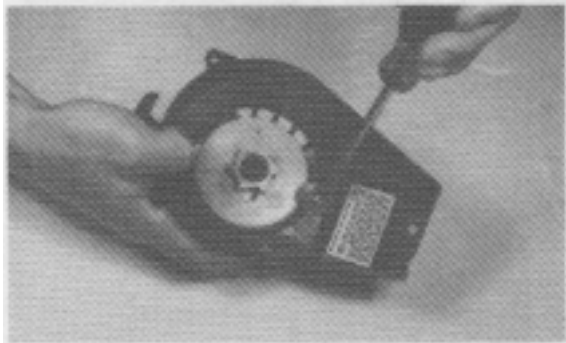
Adjust rope tension as indicated on decal located inside starter housing.
